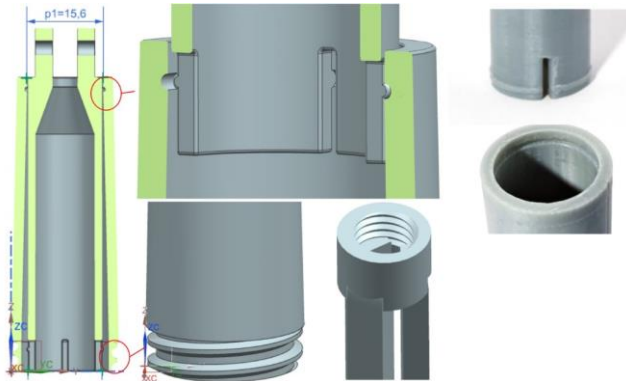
Assembly features in the design by the participant group. Annular press-fit joint (top) and printed thread (bottom).
